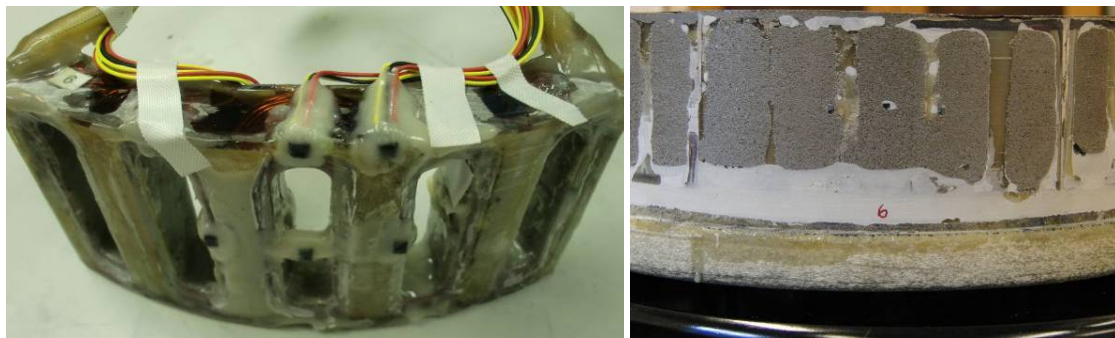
Inclusion of ball sensors (left) and their location after molding and machining (right)
